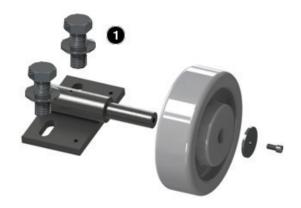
Support wheel bolts (wheel assembly appearance may vary)
